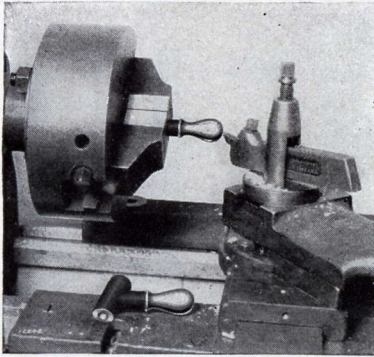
shows a two jaw lathe chuck fitted to the spindle of the lathe for holding irregular work.
